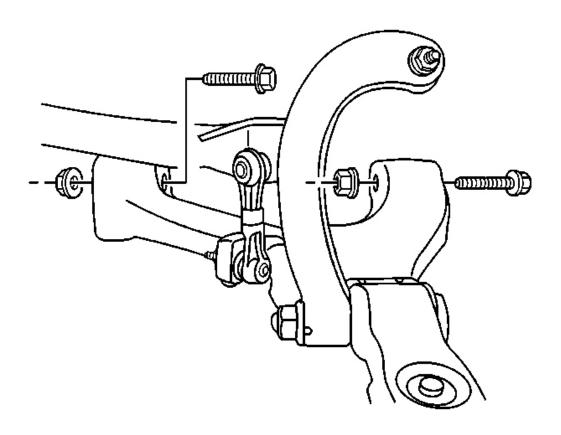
Removing/Installing Lower Control Arm-To-Lower Control Arm Bracket
